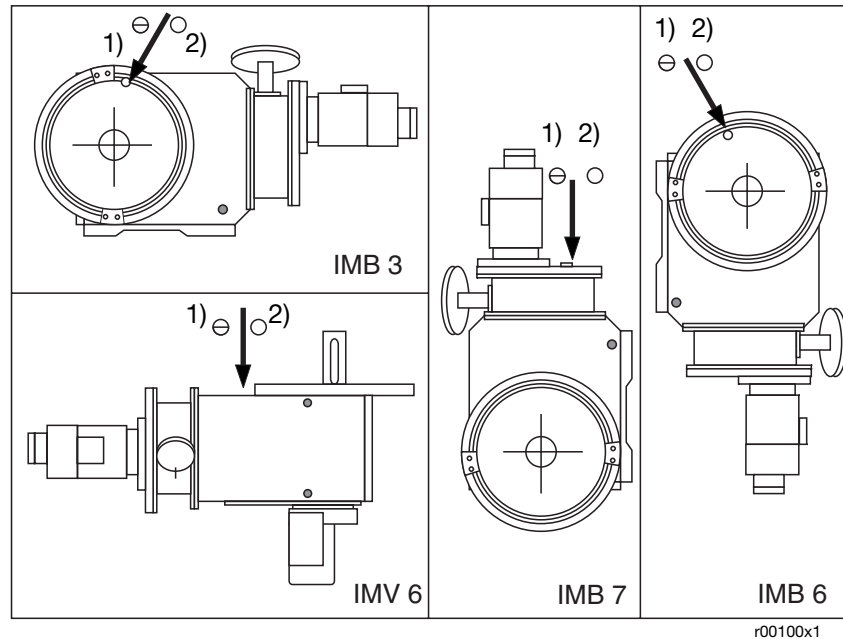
Mounting position RHDE8000 / RHDE16000: 1) check plug; 2) venting plug
